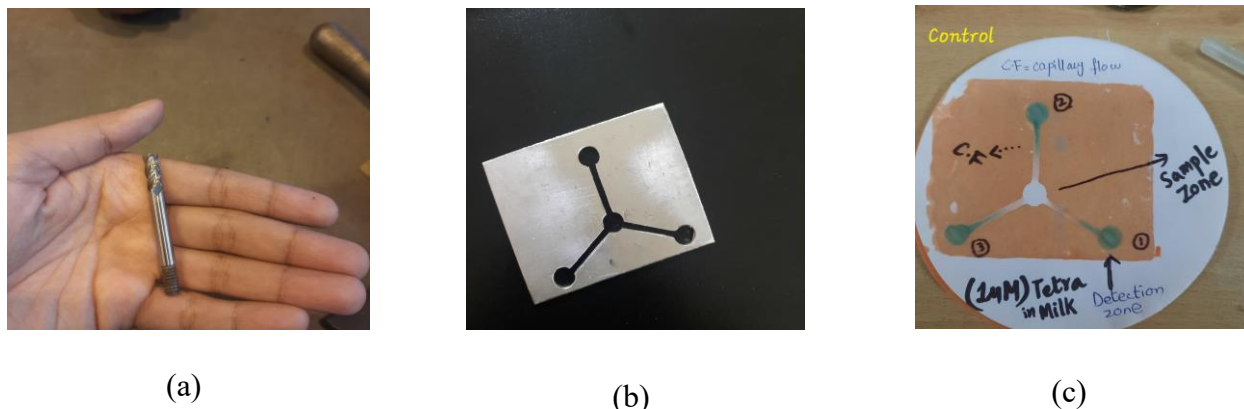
Microfluidic based paper sensor. (a): End mill cutter of diameter (3mm) (b): Aluminum Metal chip (c): Paper fabricated through hot-embossing technique
